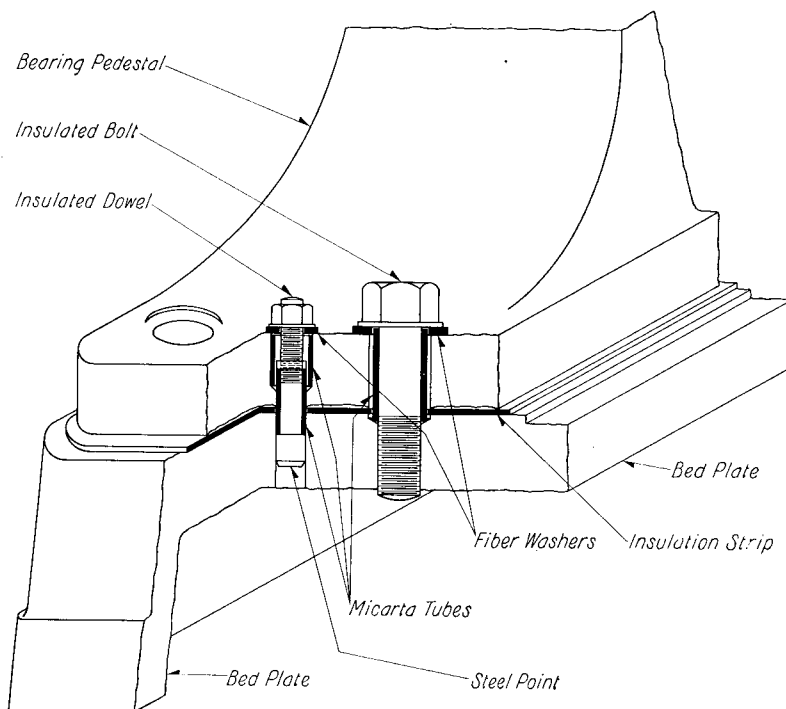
Method of Insulating Bearing Pedestal from Bed Plate
